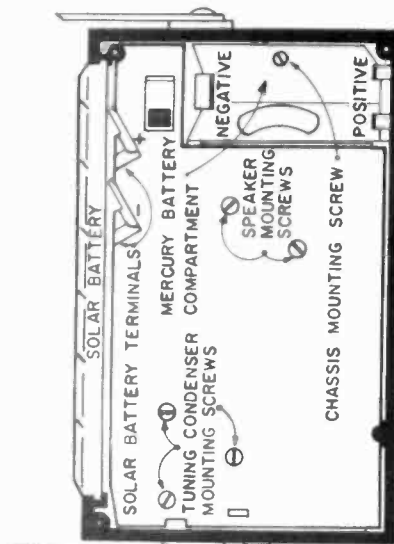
REAR VIEW - BACK COVER REMOVED
